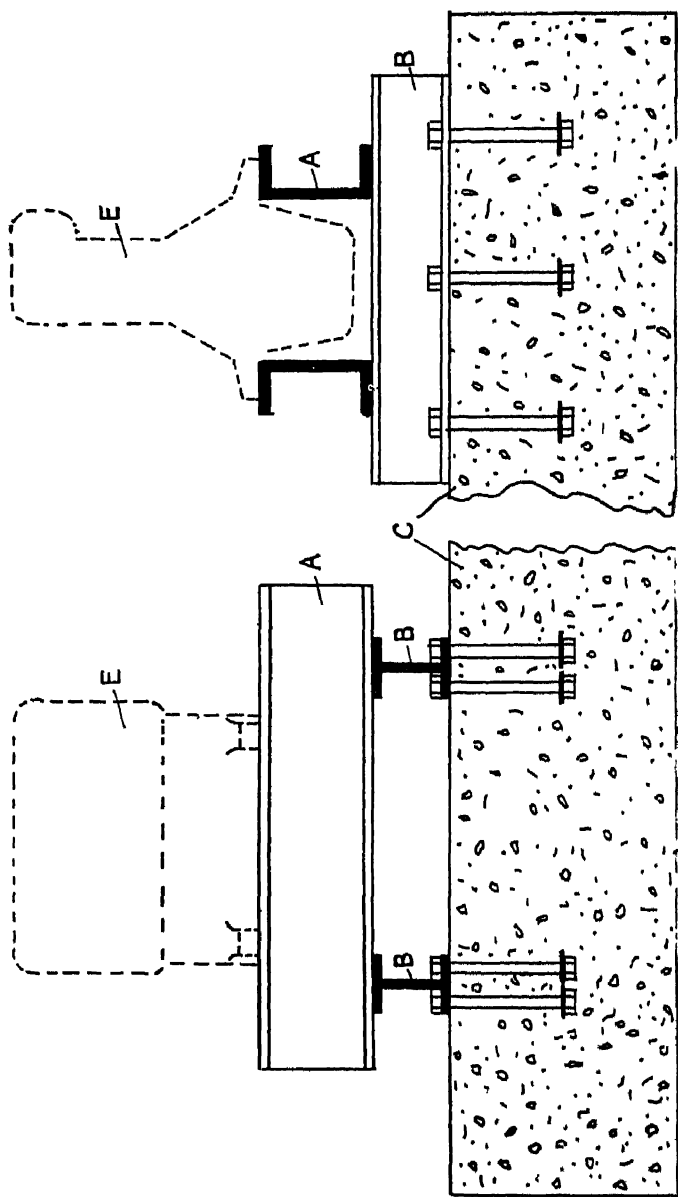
AN IMPROVED ENGINE TEST BED ON CONCRETE BASE
